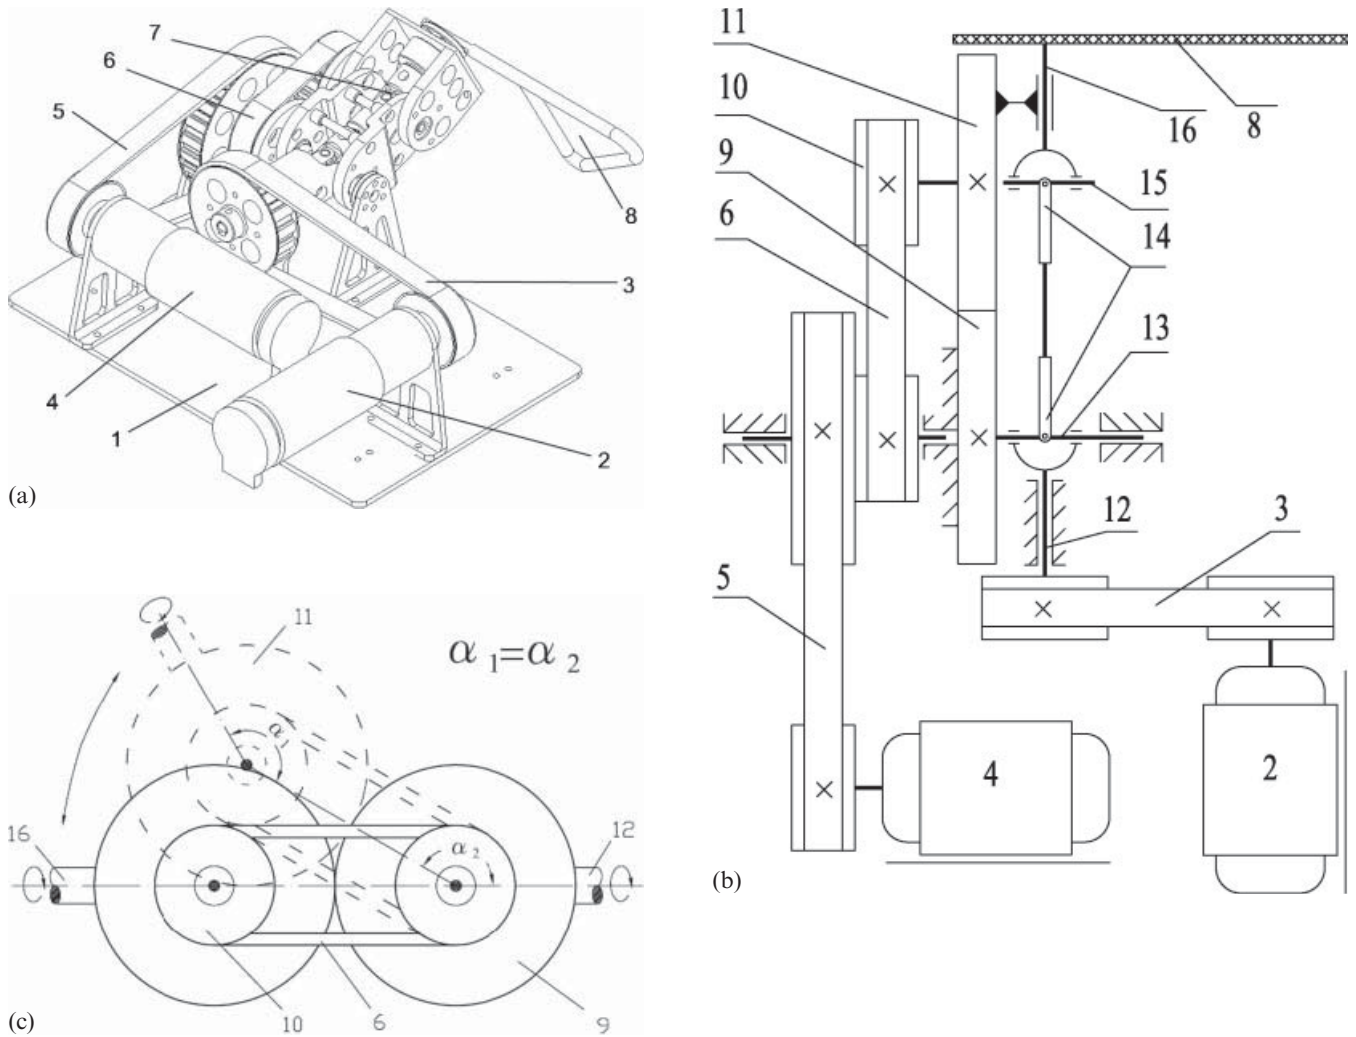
Prototype of the 2-DOF hip motion apparatus: 1, base; 2, motor for extension/flexion; 3, tooth belt transmission; 4, motor for abduction/adduction; 5 and 6, double tooth belt transmission; 7, flexible shaft; 8, frame; 9, fixed gear; 10, tooth belt wheel; 11, gear; 12, input shaft; 13, axis 1 of the universal joint pair; 14, universal joint pair; 15, axis 2 of the universal joint pair; 16, output shaft
